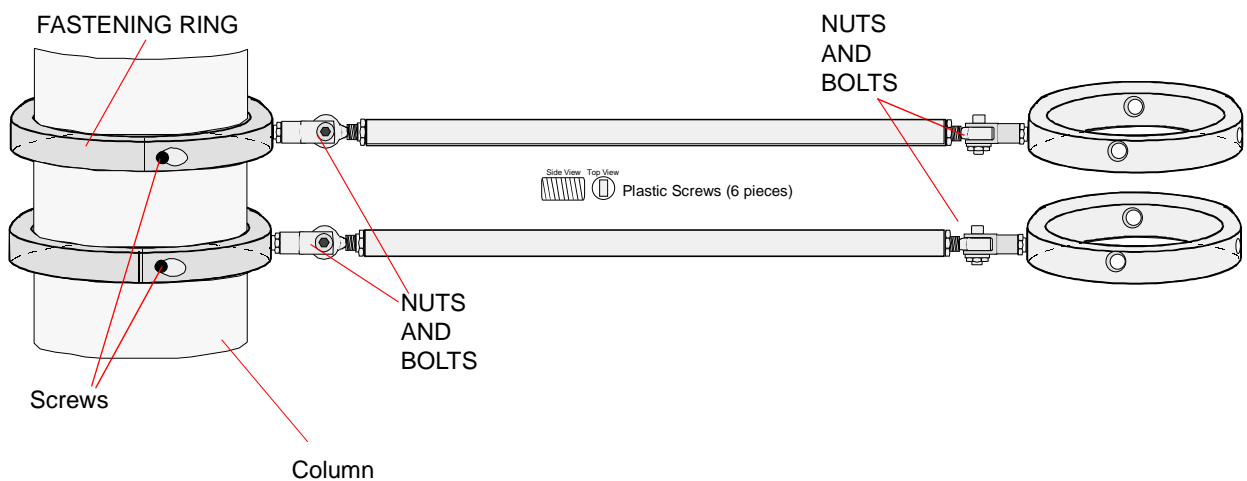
Adjustable Arm Assembly for Magnets without N2 Tower
